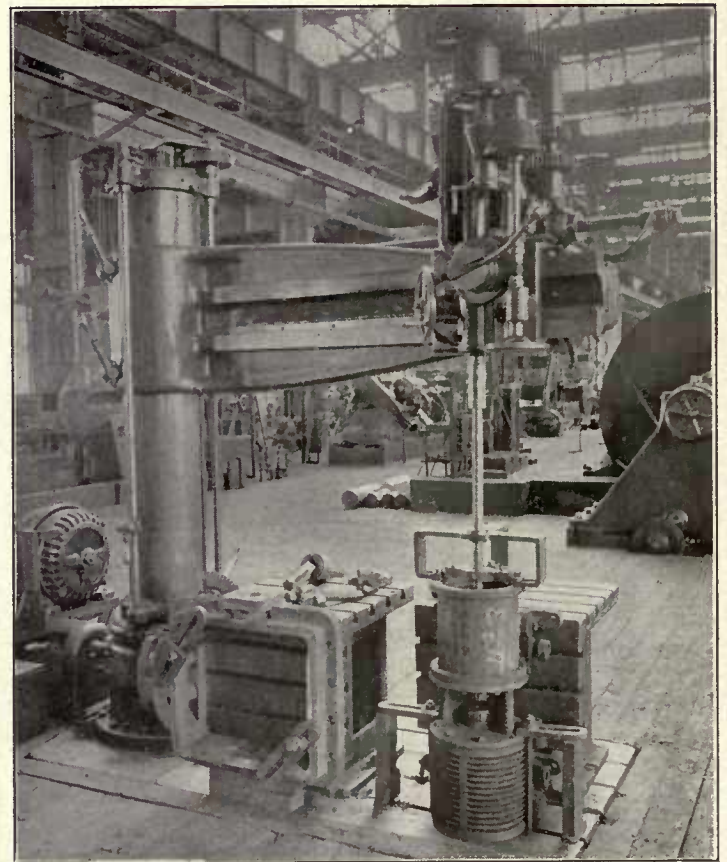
Tools for Boring Air Pump Cylinders and Steam Chests.
